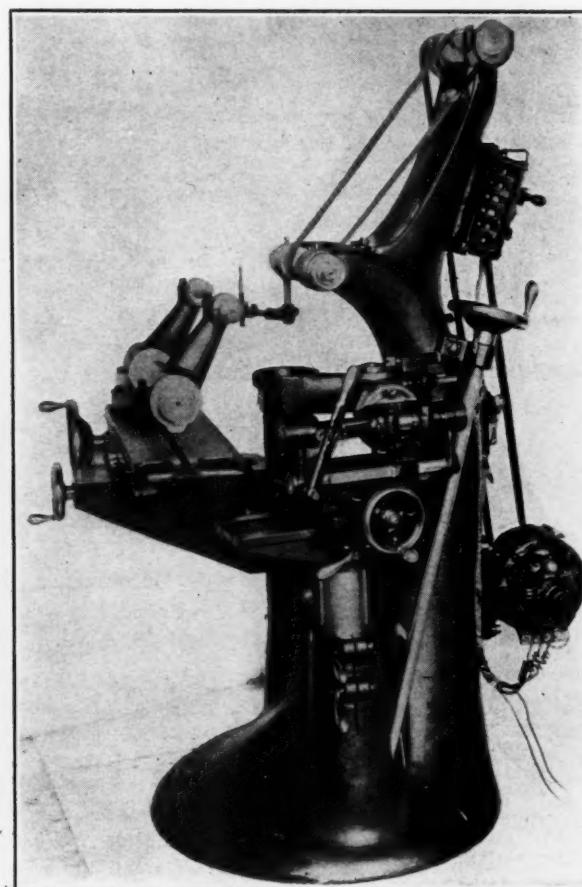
SHOWING THE MACHINE ARRANGED FOR MOTOR DRIVING.
